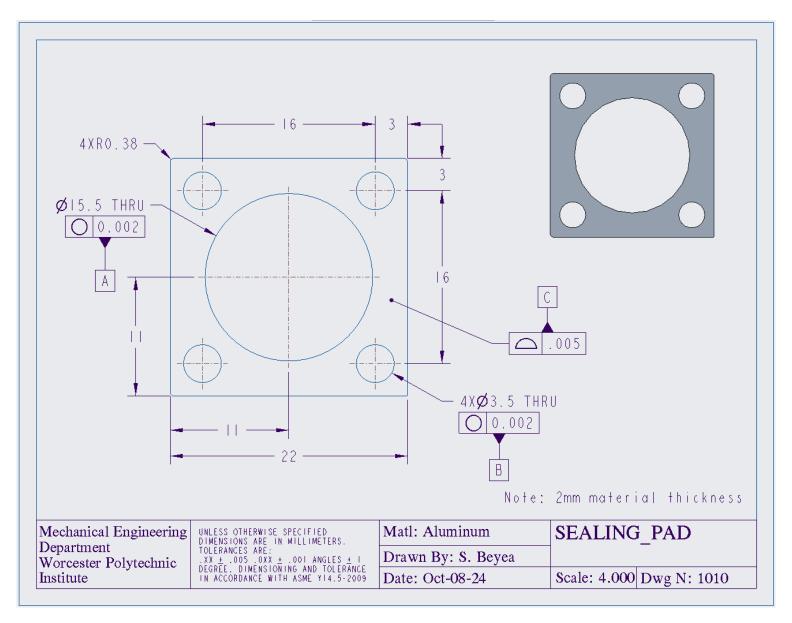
the sealing pad which seals the gas chamber of the heat cylinder.
